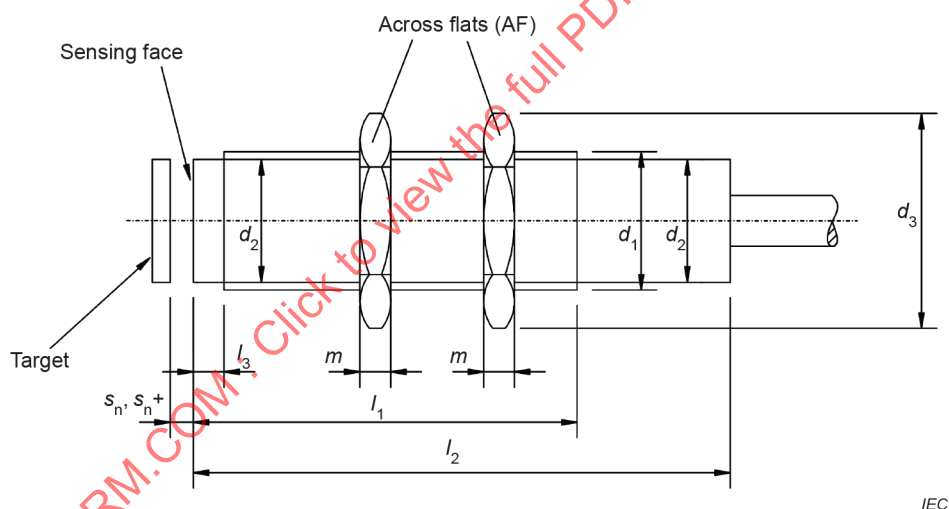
(IA) – Dimensions for threaded barrel – cable type
